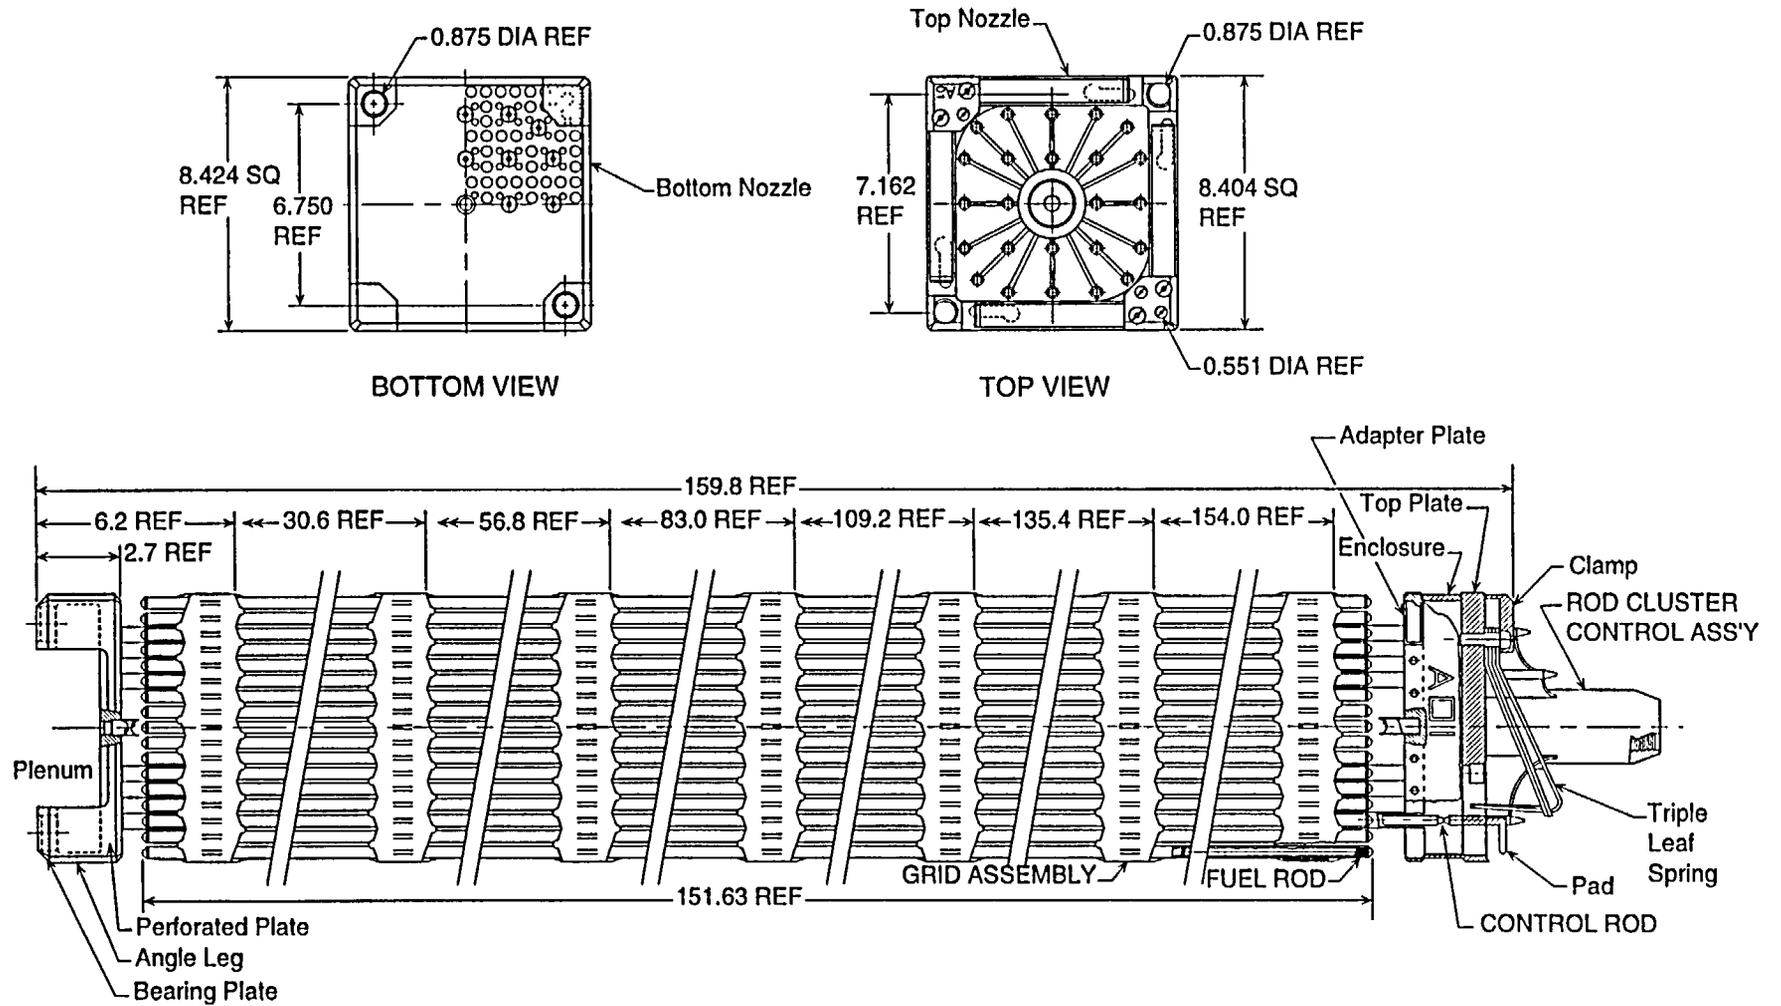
Cutaway of Typical Fuel Assembly with Control Rod
